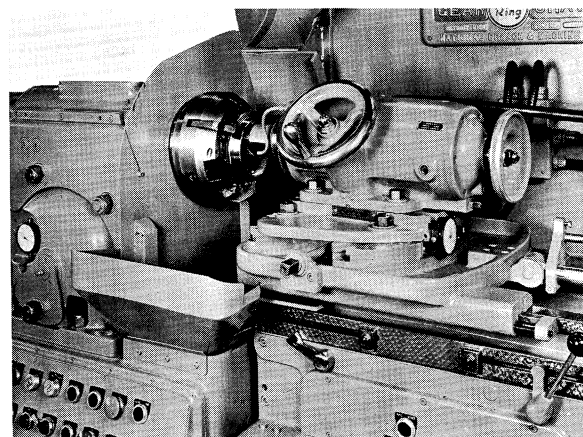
Shaving of an internal gear on a special machine in which the work drives the cutter.
